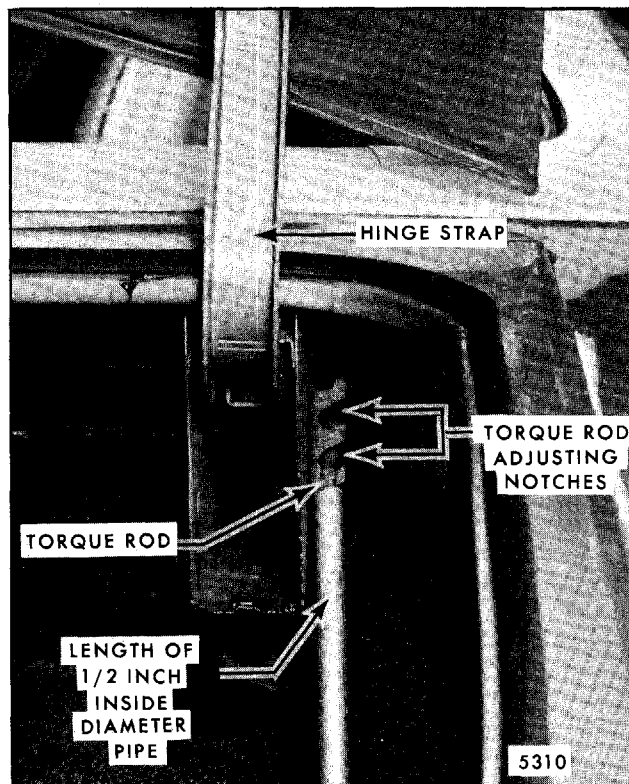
Rear Compartment Torque Rod Adjustment - "A" Styles Only
